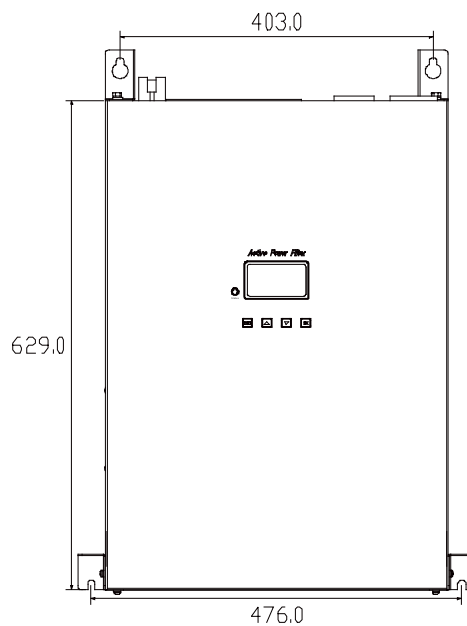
Fixed size of wall-mounted module (unit: mm)
